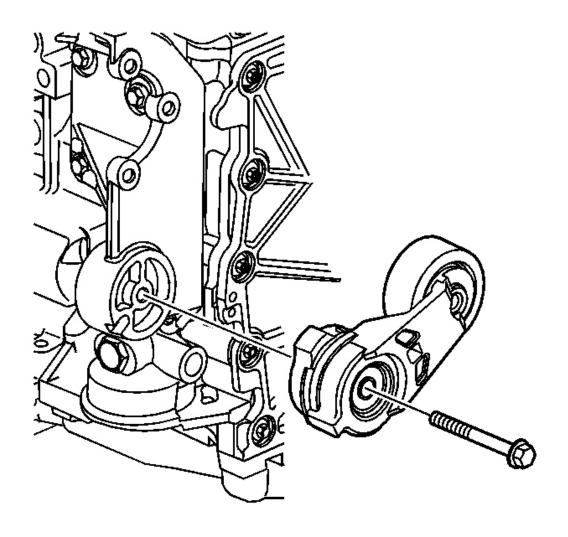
View Of Drive Belt Tensioner Courtesy of GENERAL MOTORS CORP.
